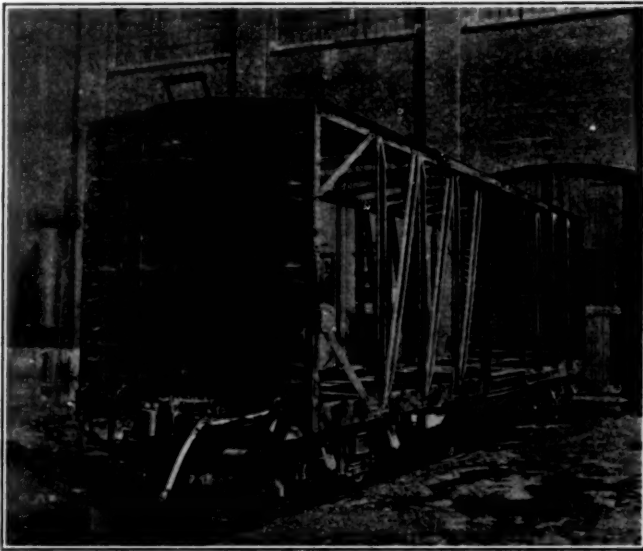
CAR WITH STEELWORK COMPLETED AND READY FOR FINISHING
